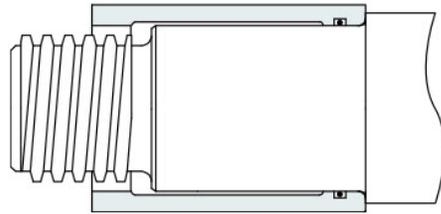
Conventional Type Shaft Sleeve Arrangement
